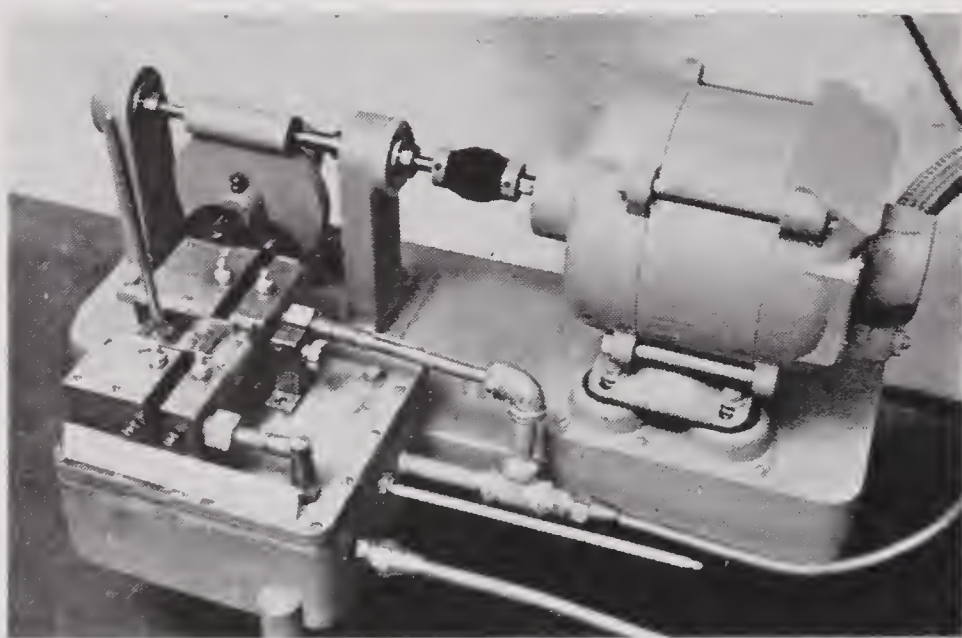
Small powder-rolling mill, complete with explosion-proof motor and worm gear.
